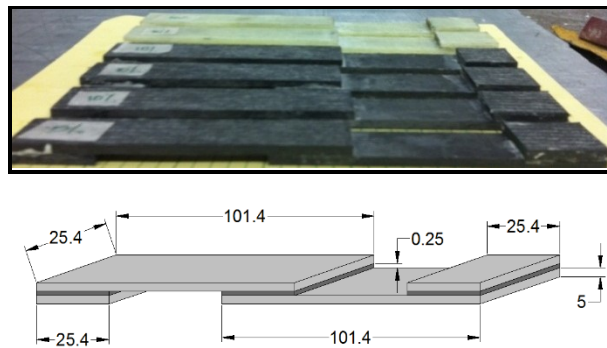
Typical single-lap joint specimens (dimensions in mm; drawing not to scale) [124].
